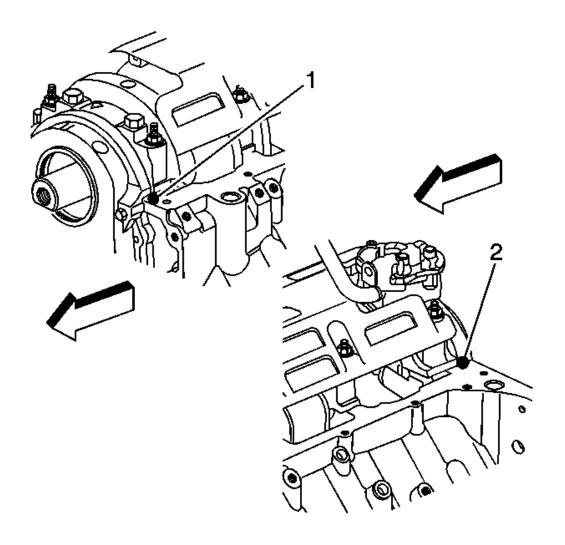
Applying Sealant To Side Of Front Cover & Rear Of Crankshaft Bearing Cap
